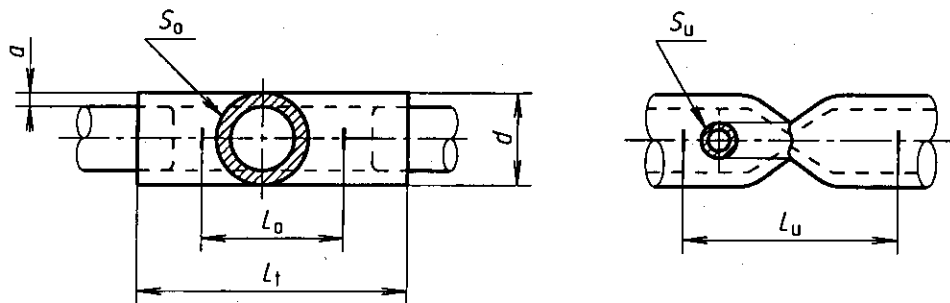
Test pieces comprising a length of tube before and after fracture
